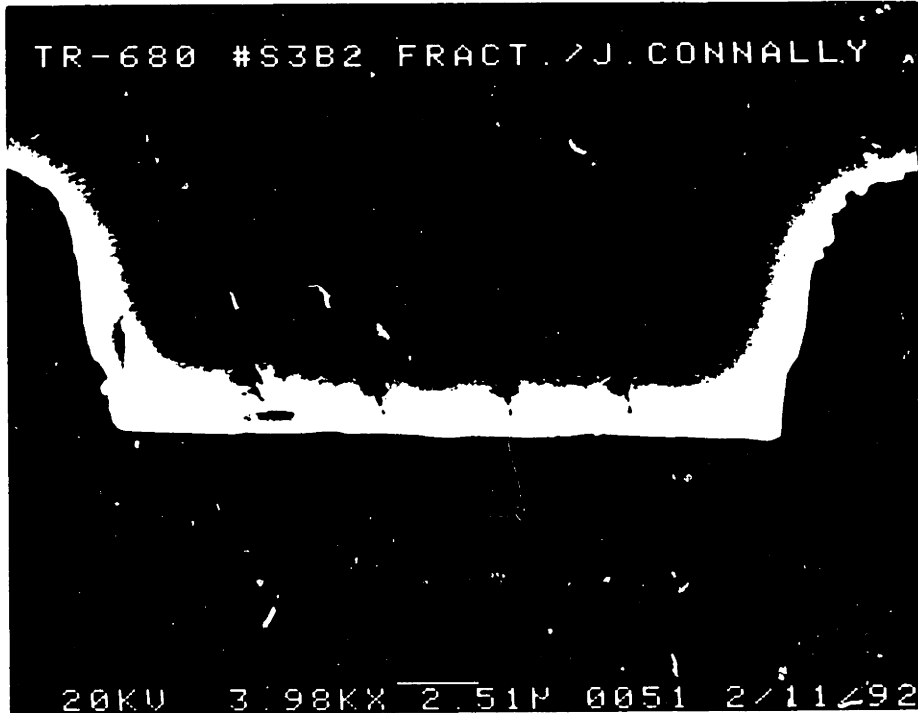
DS3B2 Fracture Surface (20°)
